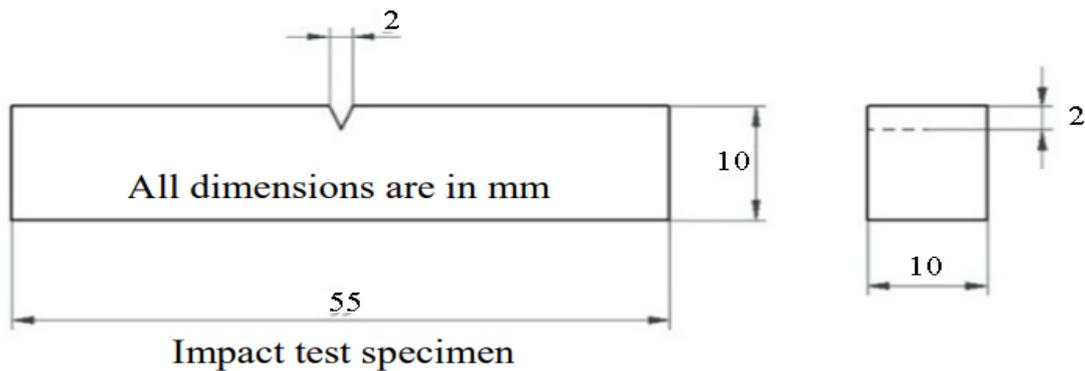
Charpy-Impact Specimen Geometry as per ASTM
